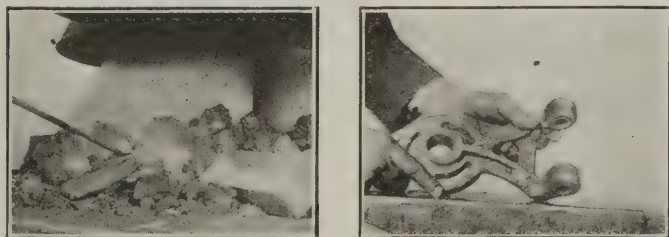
DIFFERENT WAYS OF MAKING A WELDED JOINT
